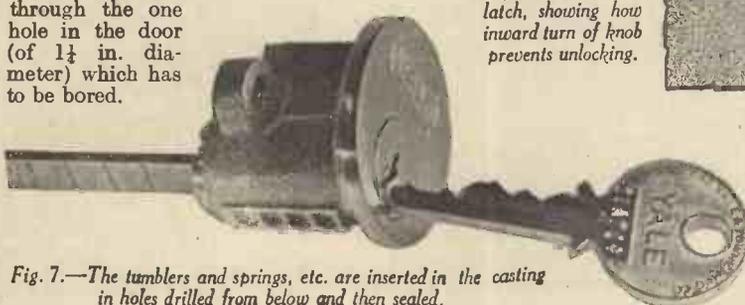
The tumblers and springs, etc. are inserted in the casting in holes drilled from below and then sealed.
